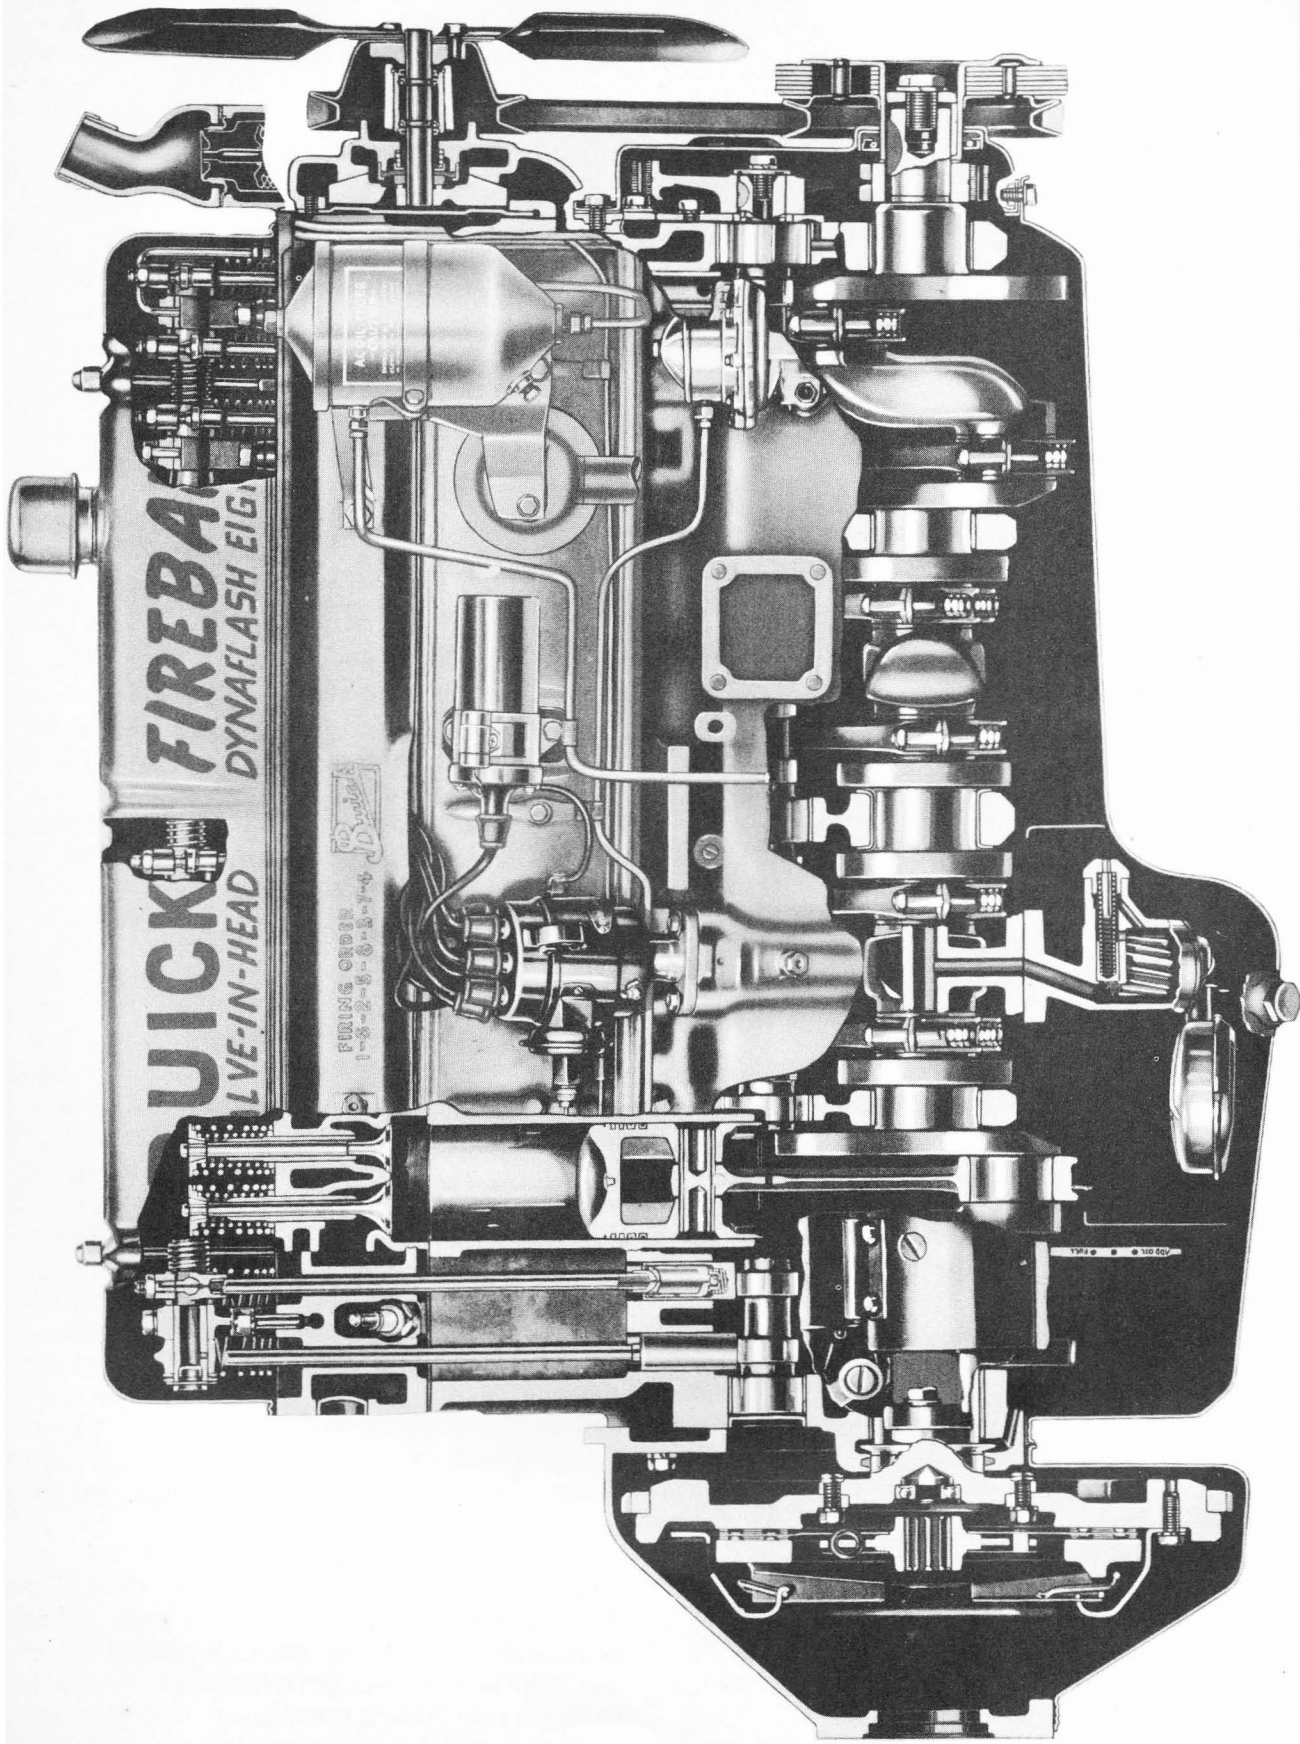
Engine, with Hydraulic Valve Lifters—Side Sectional View
